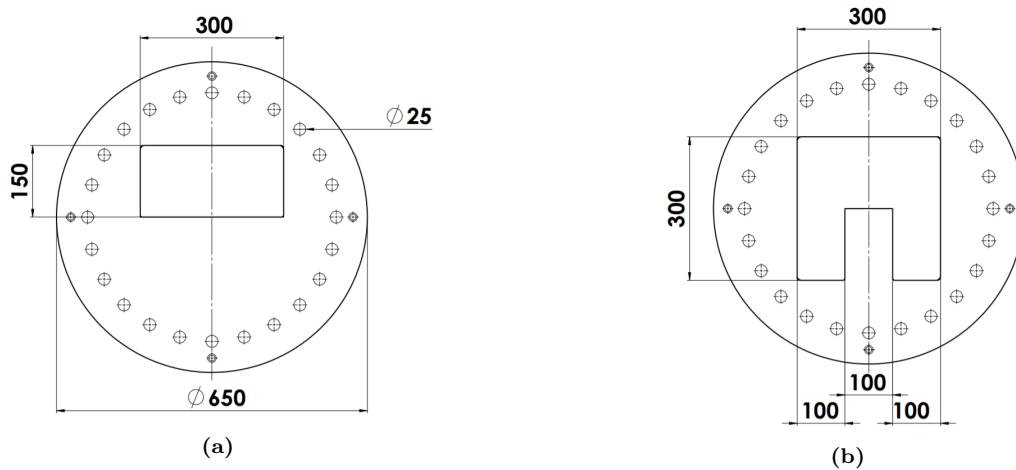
Illustration of the two driven outlet configuration (a) wall and (b) column.
